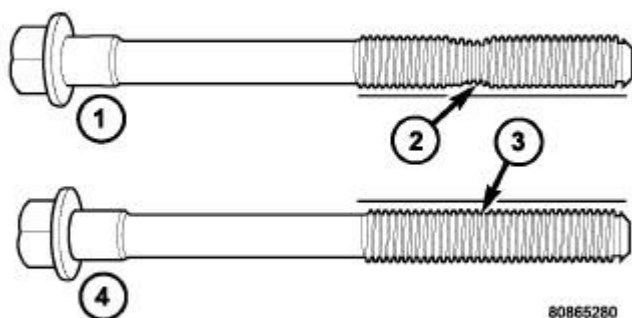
Checking Cylinder Head Bolts for Stretching (Necking)
